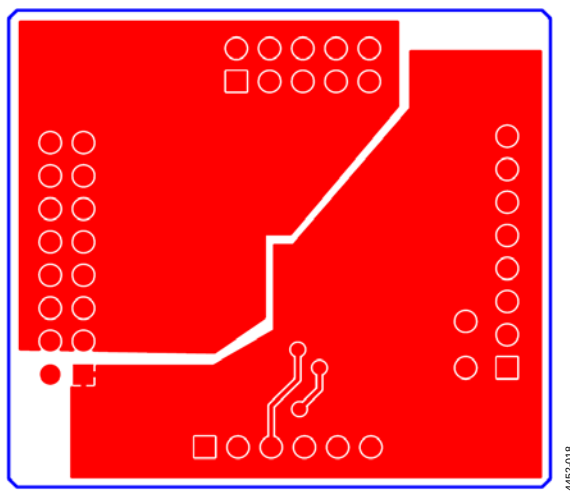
EVAL-AD5322DBZ Daughter Board Bottom Side Routing
